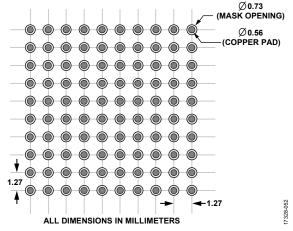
Recommend PCB Pattern, Solder Mask Defined Pads
